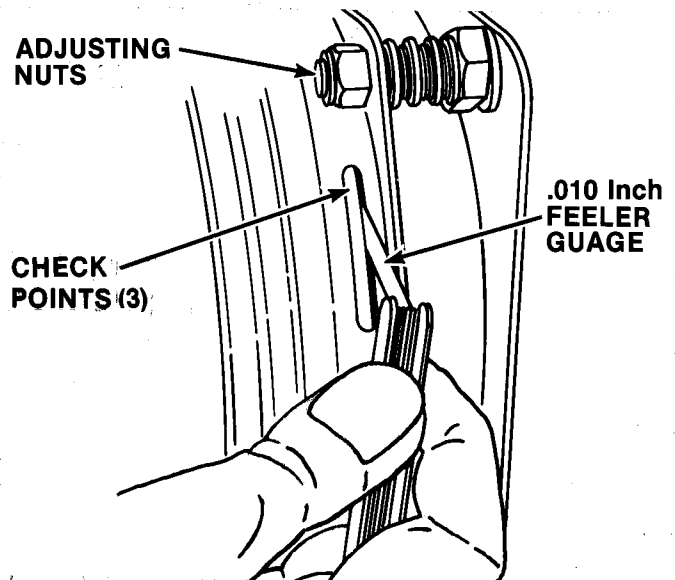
BELT DRIVE CLUTCH ADJ.
